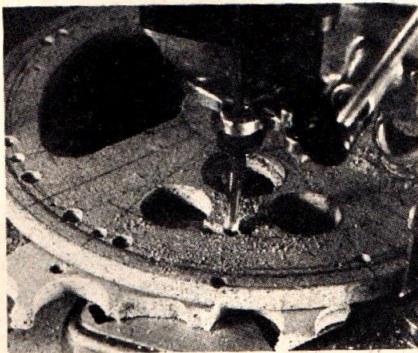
A SERIES OF SMALL HOLES can be drilled to rough-cut bulkheads to shape.
